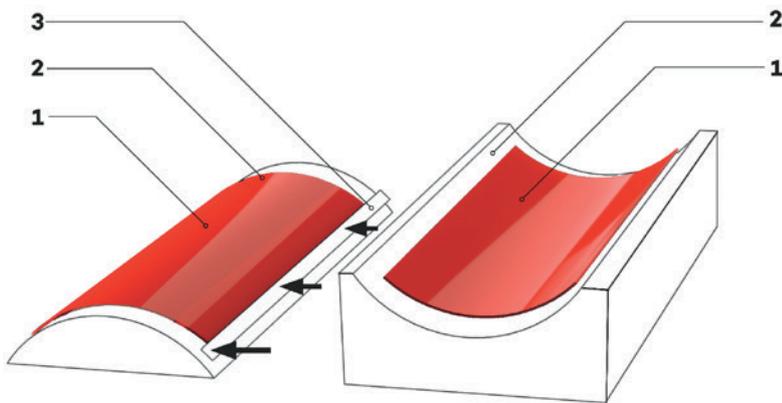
Drape forming: PLEXIGLAS® sheet (1), mold covered with cloth (2), clamping strip (3)
